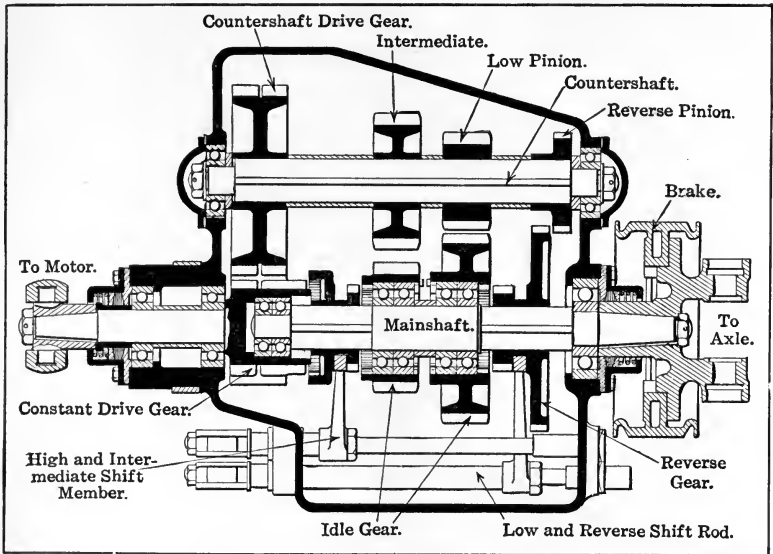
Sectional View of Individual Clutch Gearset with Silent Chains Removed to Show Arrangement of Gearing.
